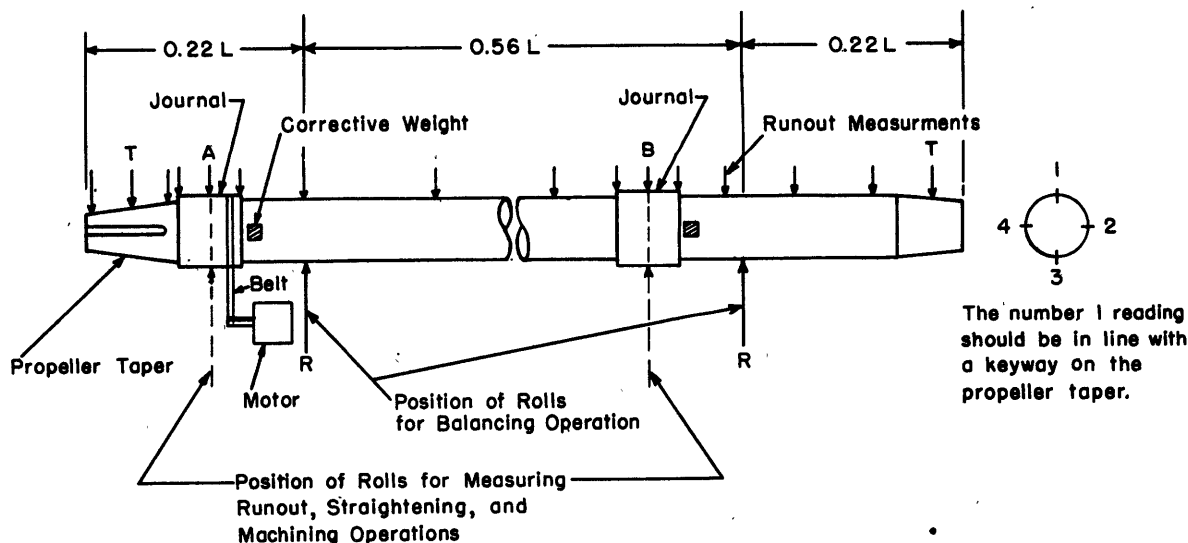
Setup for Balancing and Straightening Propulsion Shafting
